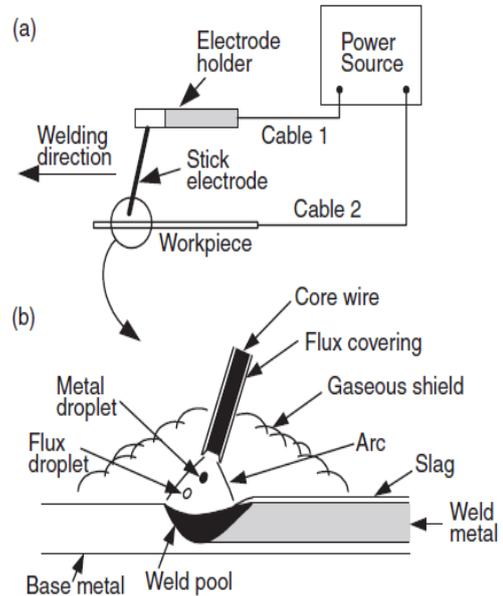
Shielded metal arc welding: (a) overall process; (b) welding area enlarged.
